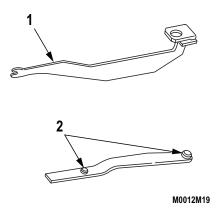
Vertical Cam Assembly and Primary Drive Lever Lubrication.
